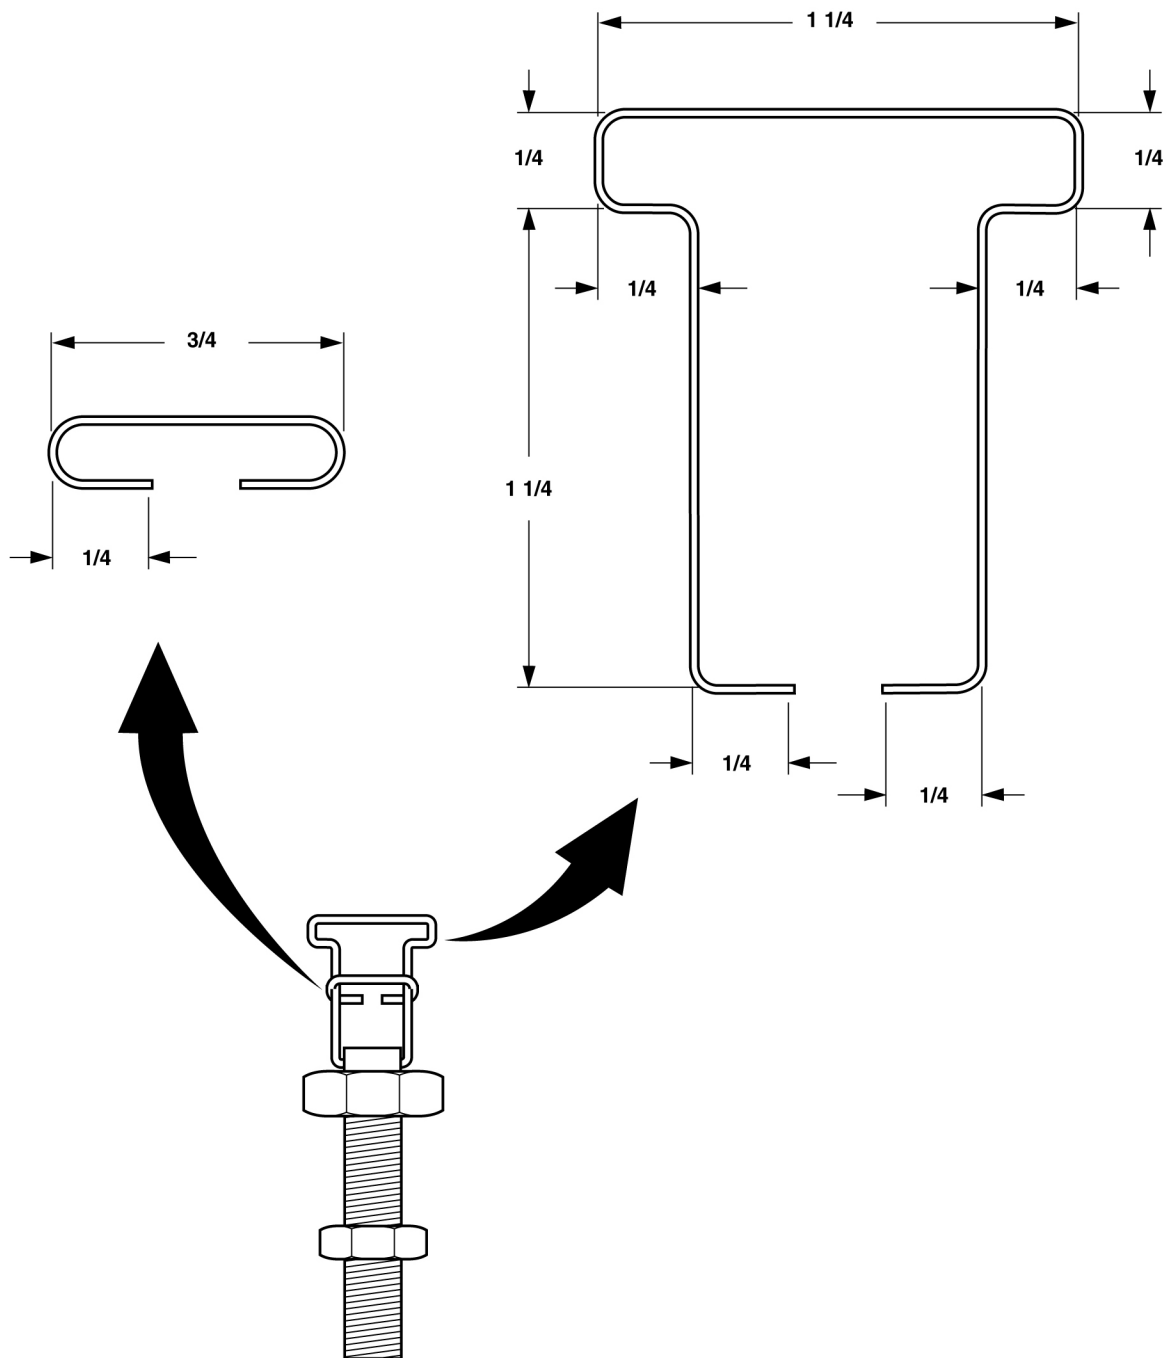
Switch Box Load Terminal Repair (A, B, & C Models).
